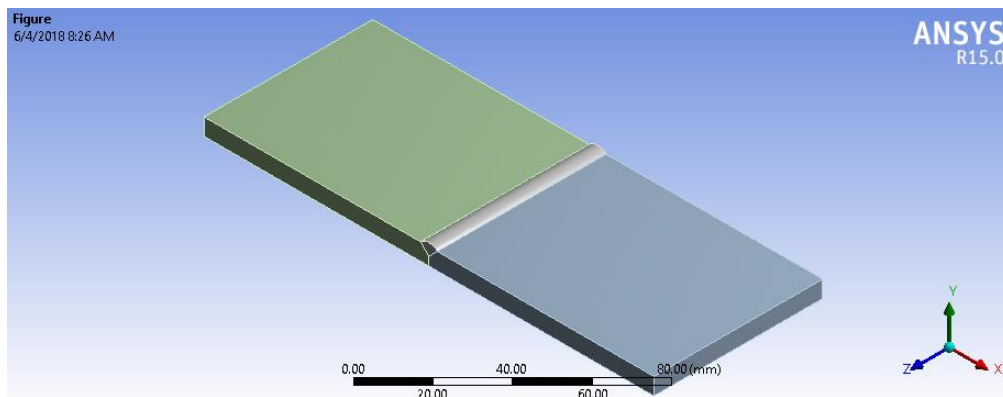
3D CAD Model of Closed Butt-weld Joint Geometry of Welded Sample
